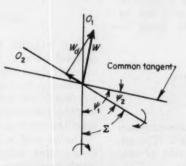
Follower shaft rotation if helix on driver is left-hand.
